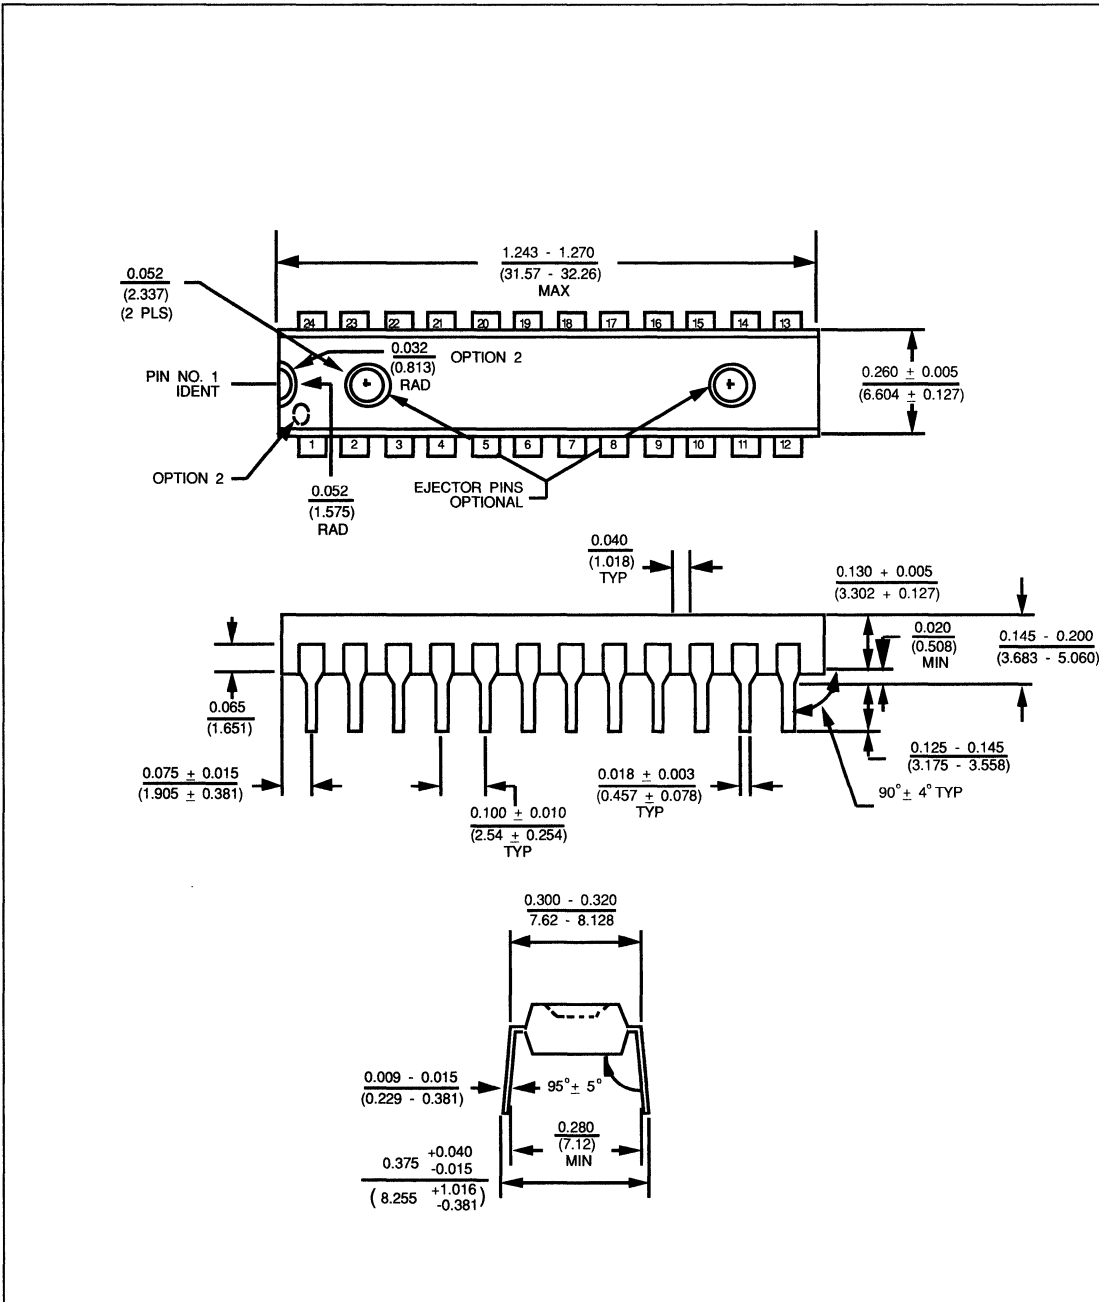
24-PIN DIP PACKAGE DRAWING
